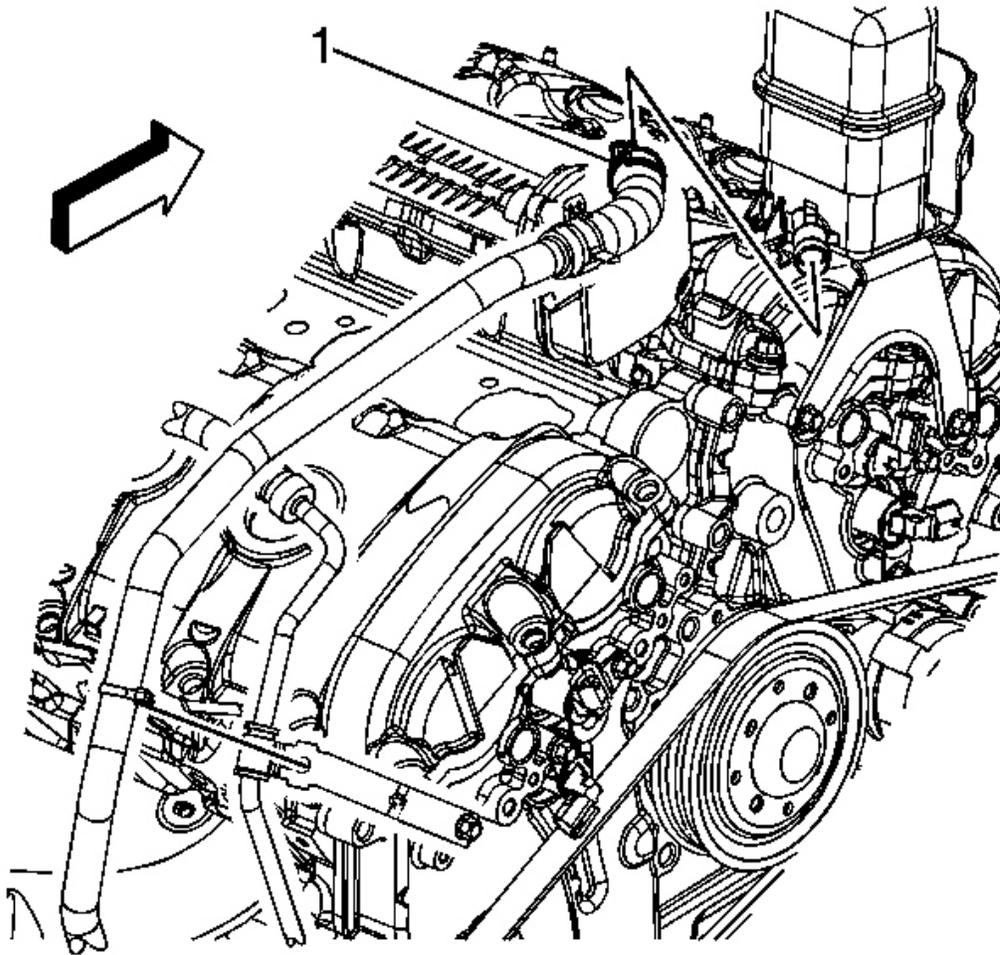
View Of Power Steering Fluid Reservoir Outlet Hose & Clamp
